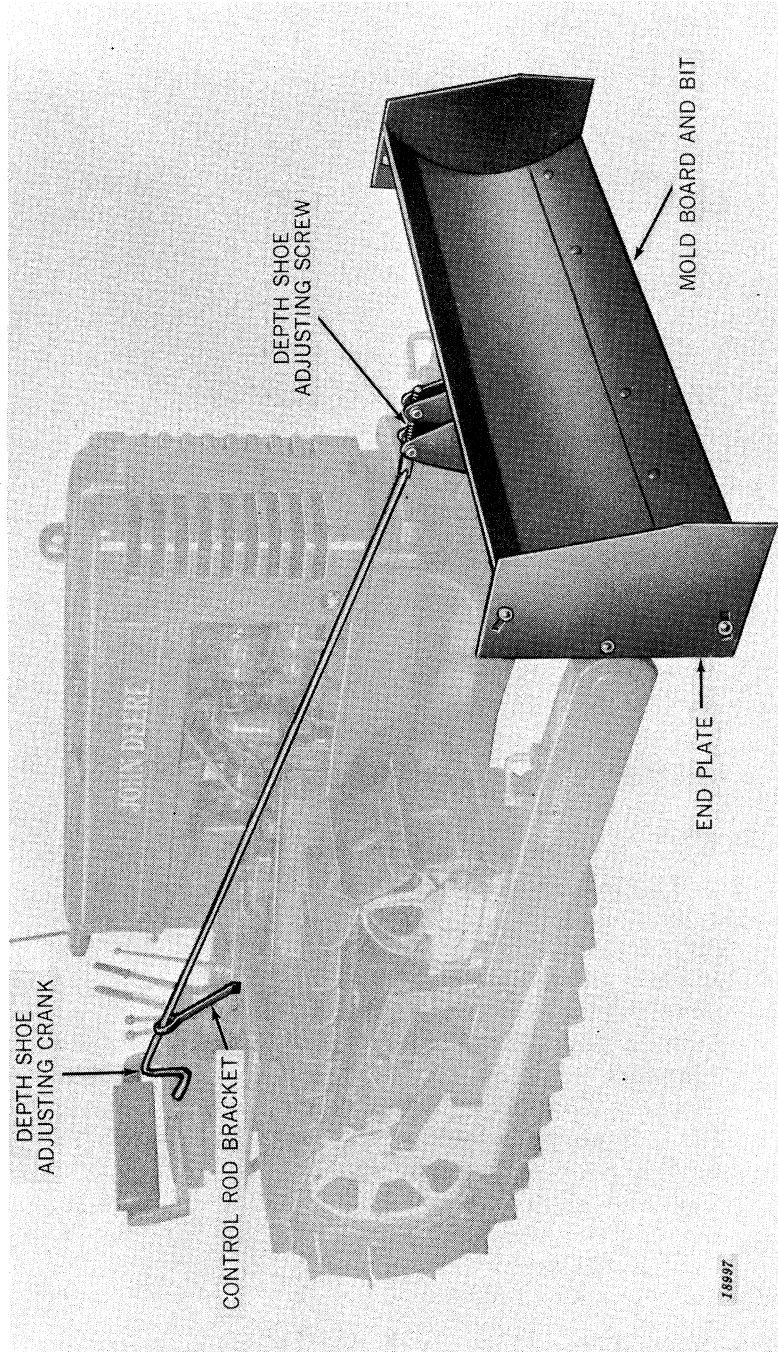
John Deere Model MC-100 Bulldozer Mounted on MC-1000 Integral Tool Carrier and "MC" Tractor
